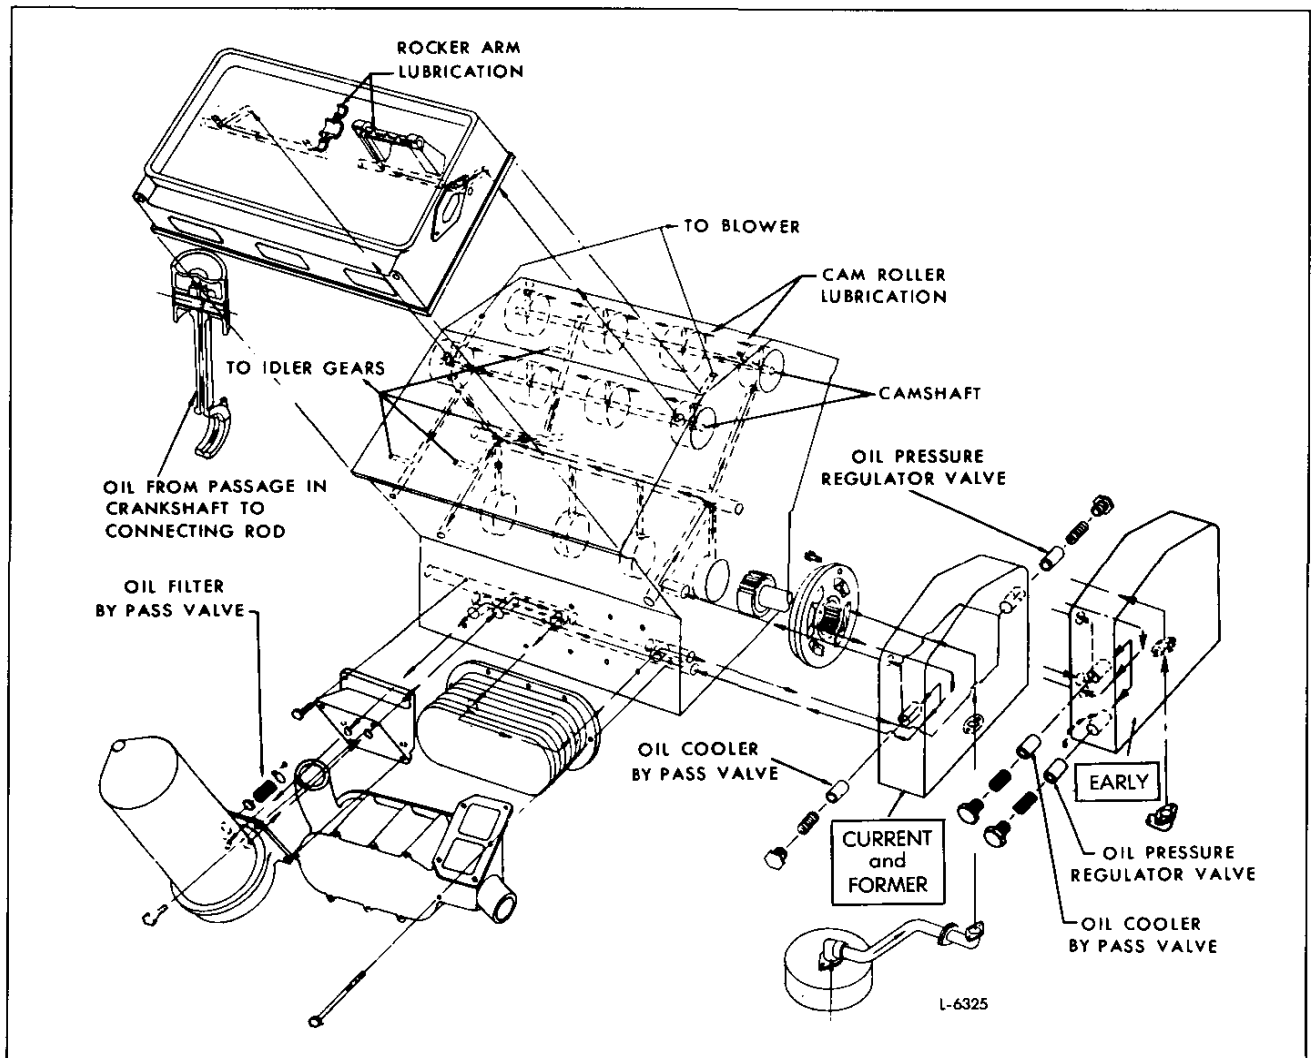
Schematic Diagram for 6V-53 Engine Lubrication System
